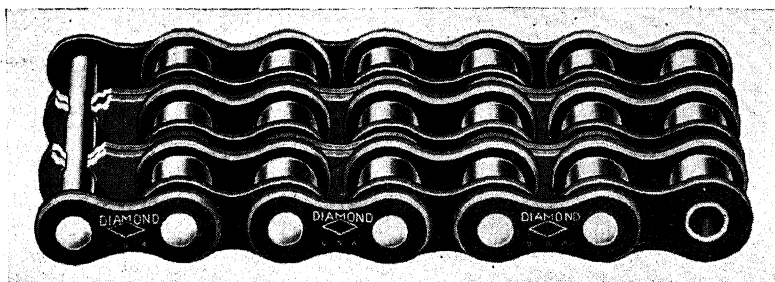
Multiple-strand roller chain. (Courtesy Diamond Chain and Manufacturing Company.)
